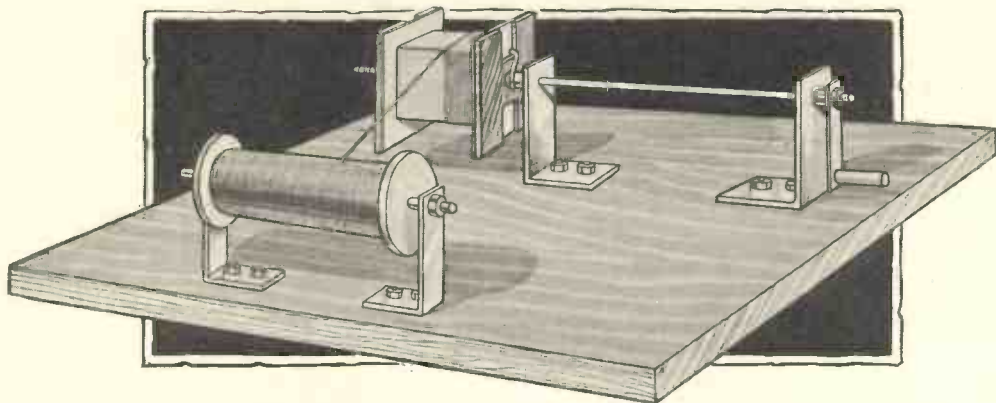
SHOWING A SIMPLE WINDING MACHINE AND REEL CARRIER RIGGED UP FOR WINDING A MAINS TRANSFORMER.
